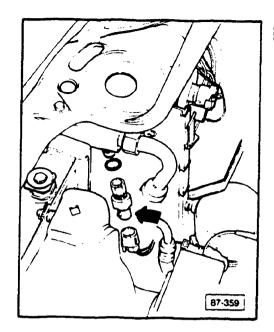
A/C high pressure cut-out switch (4-cylinder engine)
